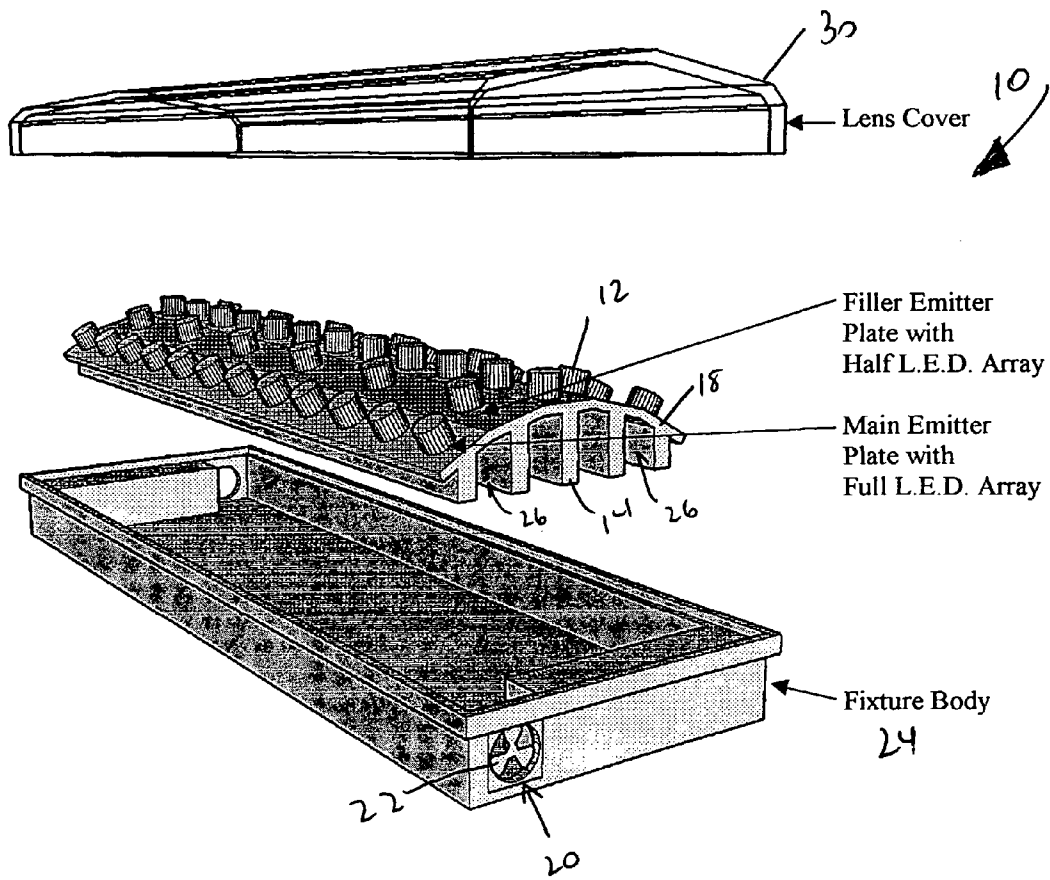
Mounting Bar and Multiple Angled Emitter Plate Assembly
